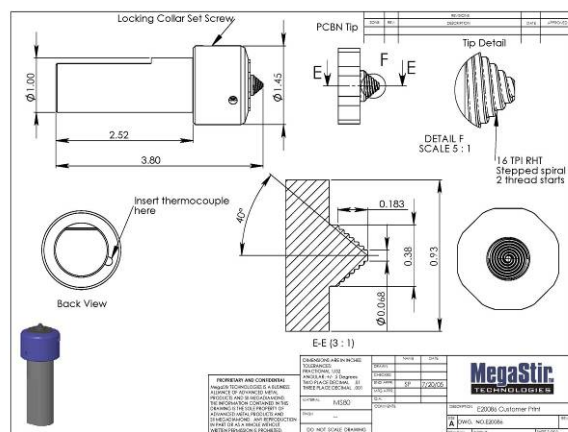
Drawing that illustrates shape of conventional friction-stir shoulderless tool geometry
